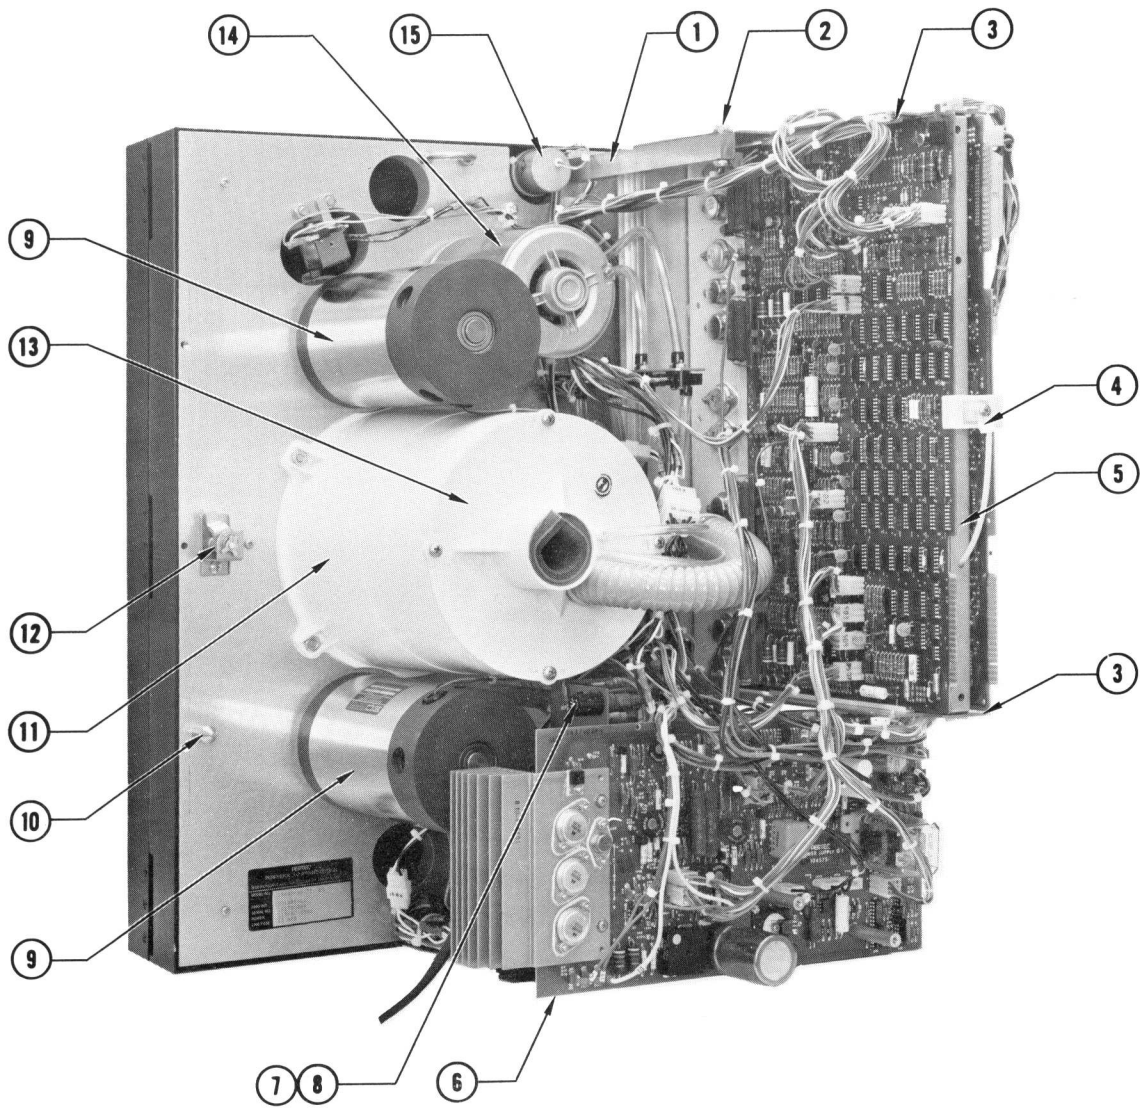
TU45 Transport Photo Parts Index, Rear View
